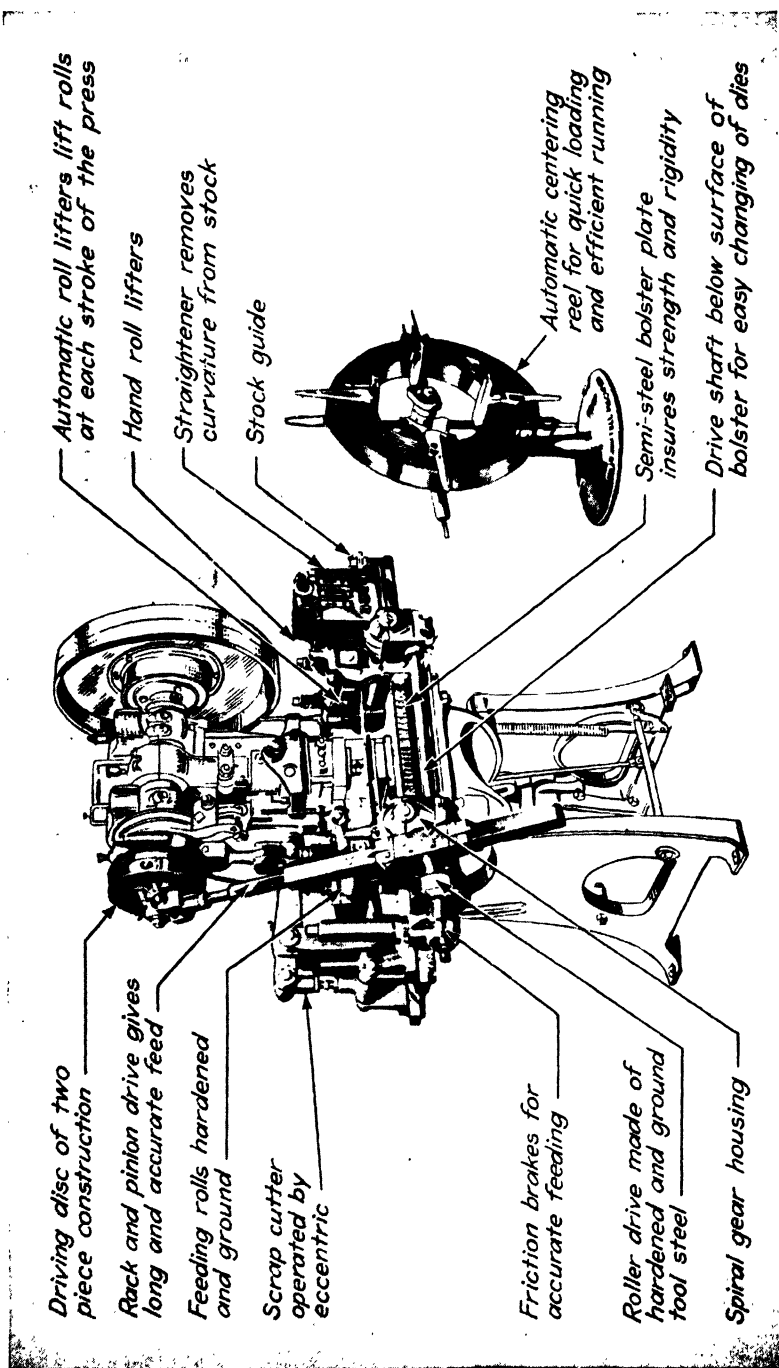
A double-roll automatic feed set up on an open-back gap-type inclinable press. Among its useful features are rack-and-pinion drive, seven-roll ball-bearing straightener, eccentric-operated scrap cutter, and standard automatic roll lifters.
